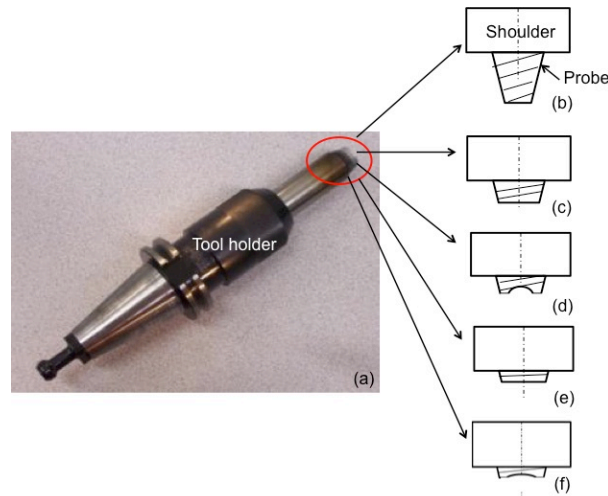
Morphology of the FSP tool (a) Image showing the FSP tool holder and tool head (b) ~ (f) schematic diagrams of the tool head showing various probe shapes and lengths.
